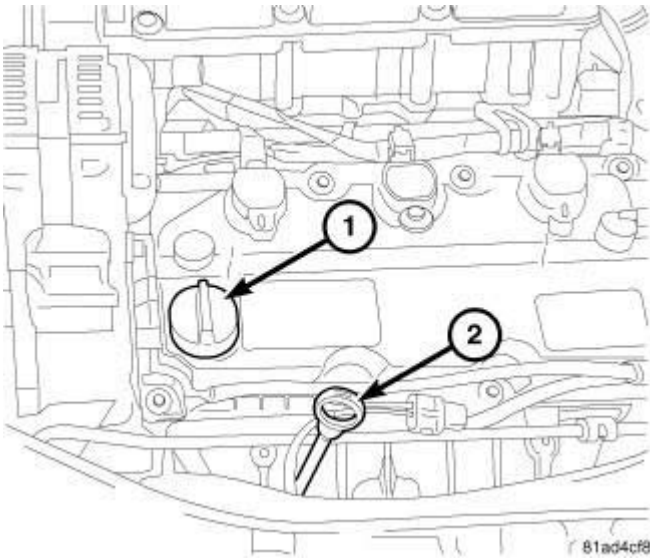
ENGINE OIL FILLER CAP & DIPSTICK
